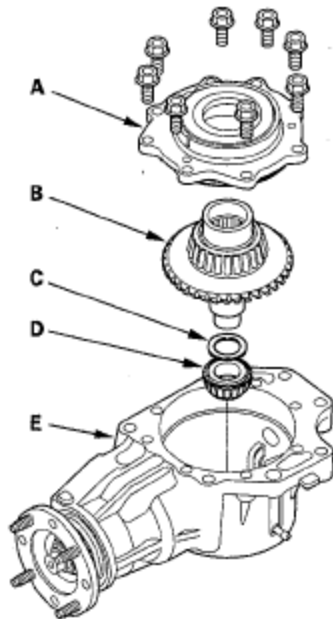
Identifying Tapered Roller Bearing And Transfer Cover With Thrust Shim
